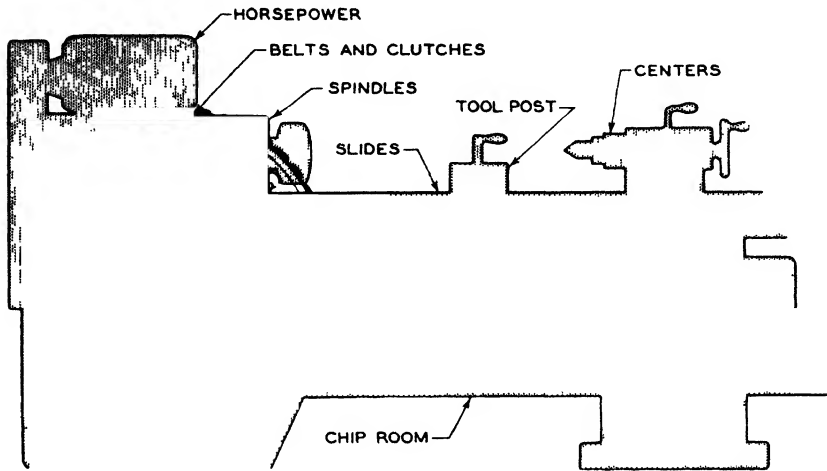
Points to Check When Converting Larger Machines to Carbides
